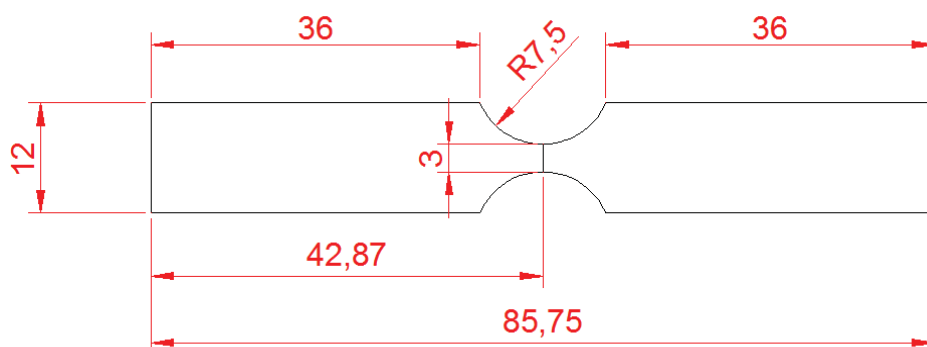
Tensile and fatigue test sample dimensions (mm)
